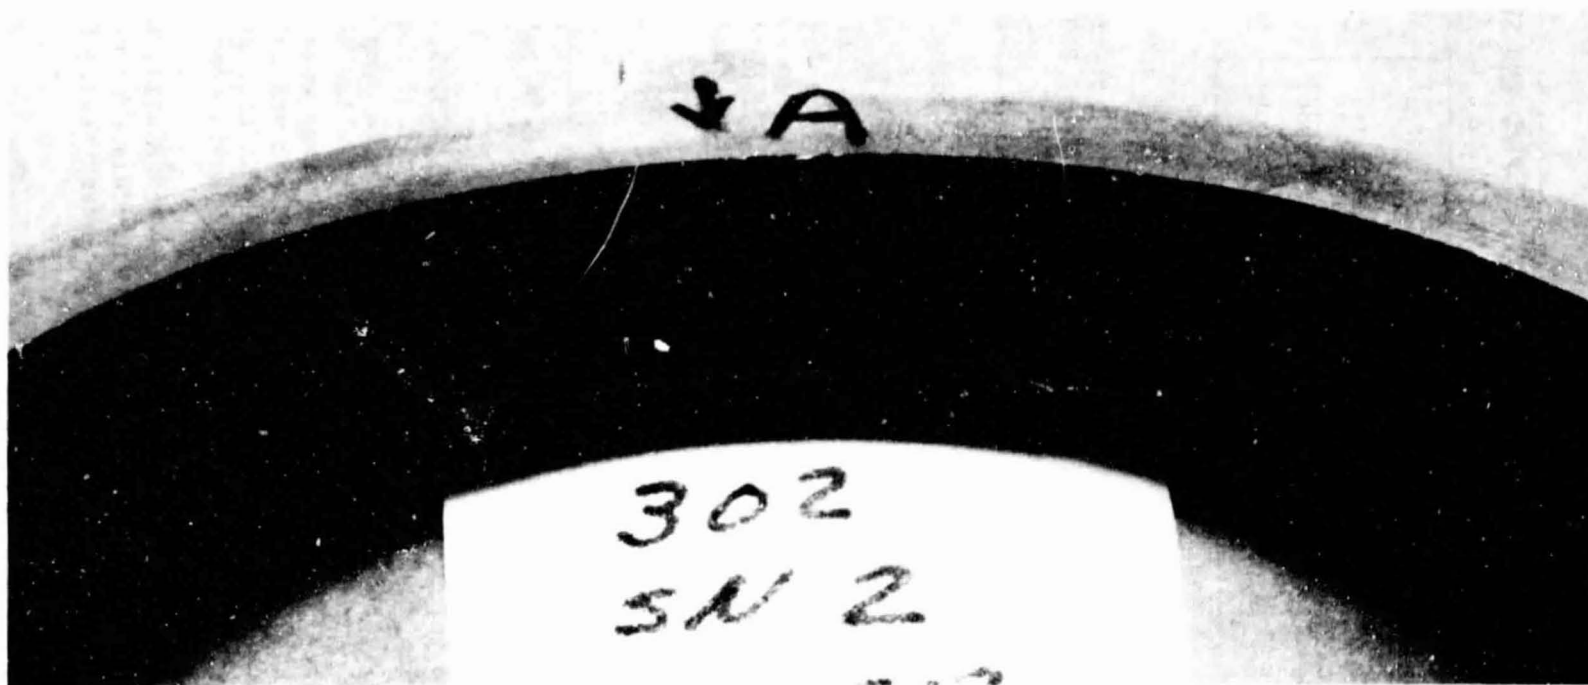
Pump End Primary Seal Ring, P/N 99RS010302, S/N 067602, Build 4, Posttest 12
